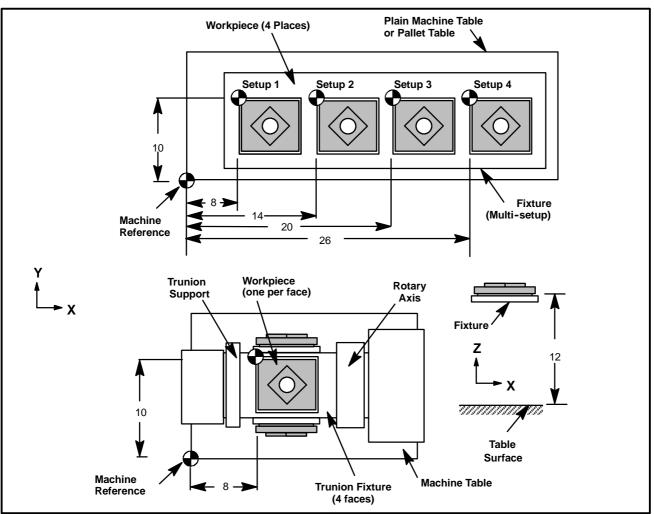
Multi-Setup Example The equipment which may be supplied with the machining centre will have some bearing as to the manner in which a Multiple Setup is arranged. Workpieces may be located about a plain machine table, or be clamped onto a pallet table associated with an Automatic Workchanger System (AWS), or may be attached to fixtures arranged radially around a rotating trunion powered from a programmable Rotary Axis. Multi-Setups for all configurations are illustrated in the figure above and described in the procedures which follow.
